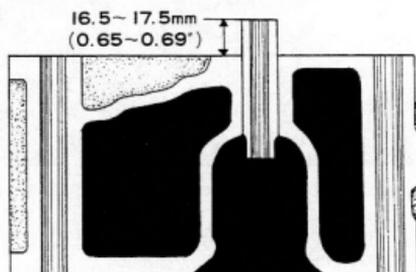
Valve Stem Guide X4932 Extrusion (Intake)
